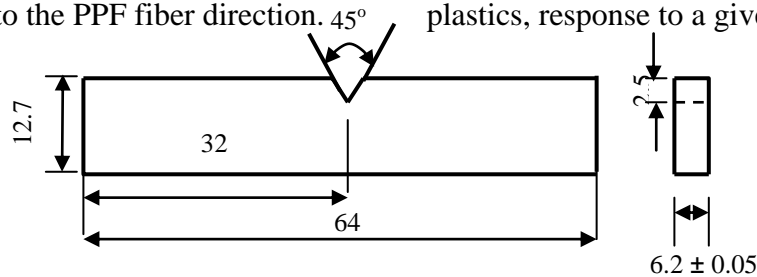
Dimensions of Izod test specimen (DIMS in mm) according to ASTM-D256-81
